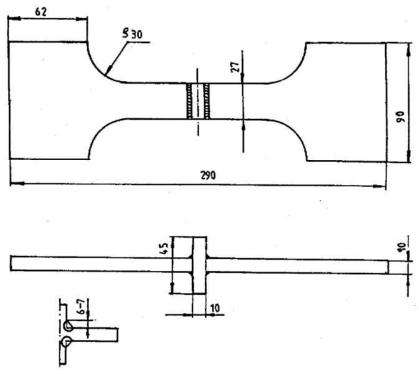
Specimen for fatigue testing, model of cross welded joint of rotor excavator arrow
